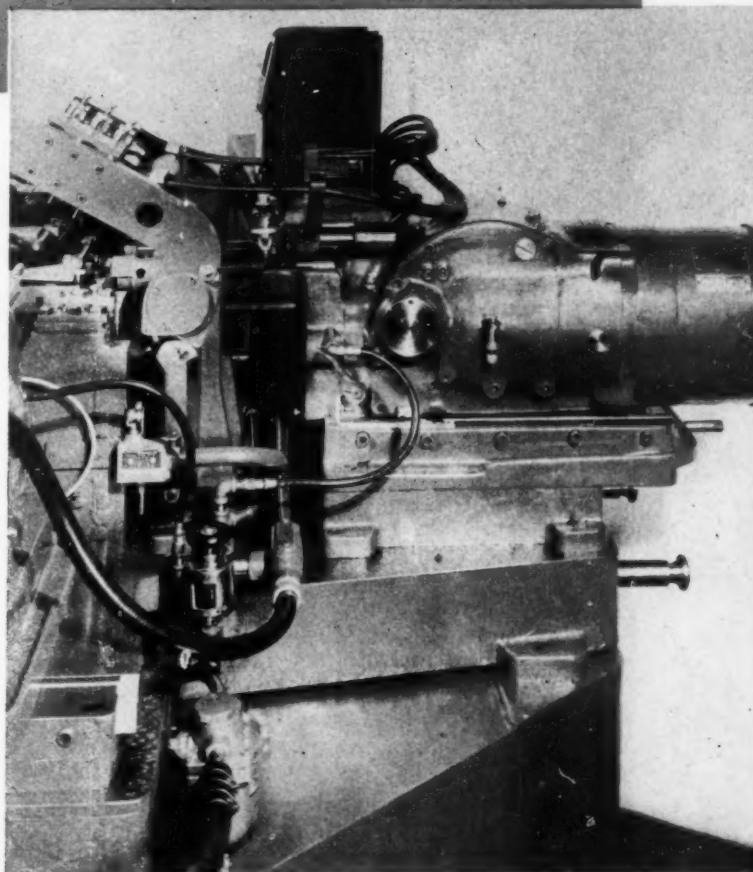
Rear drill head mounted on a single slide. It center bores and faces automatically when the blade is positioned by zero readings on indicating instrument
